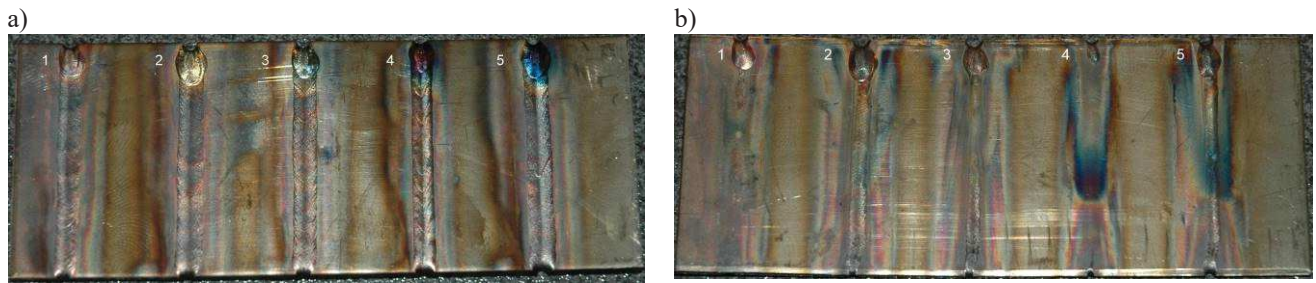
A view of the bead-on-plate welds produced by high power diode laser melting of 2.0 mm sheet of AISI 304 stainless steel (Tab. 3); a) weld face, b) roof surface
